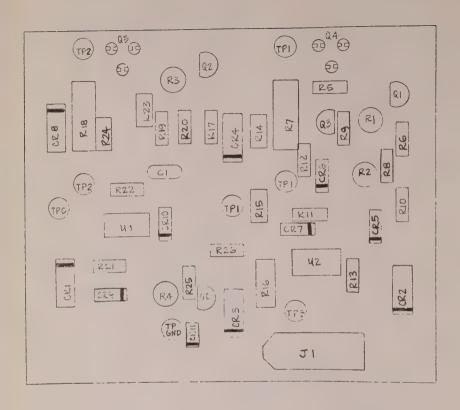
OPTION 06 BATTERY PACK AND CHARGER ASSEMBLY #05772501 Rev C
